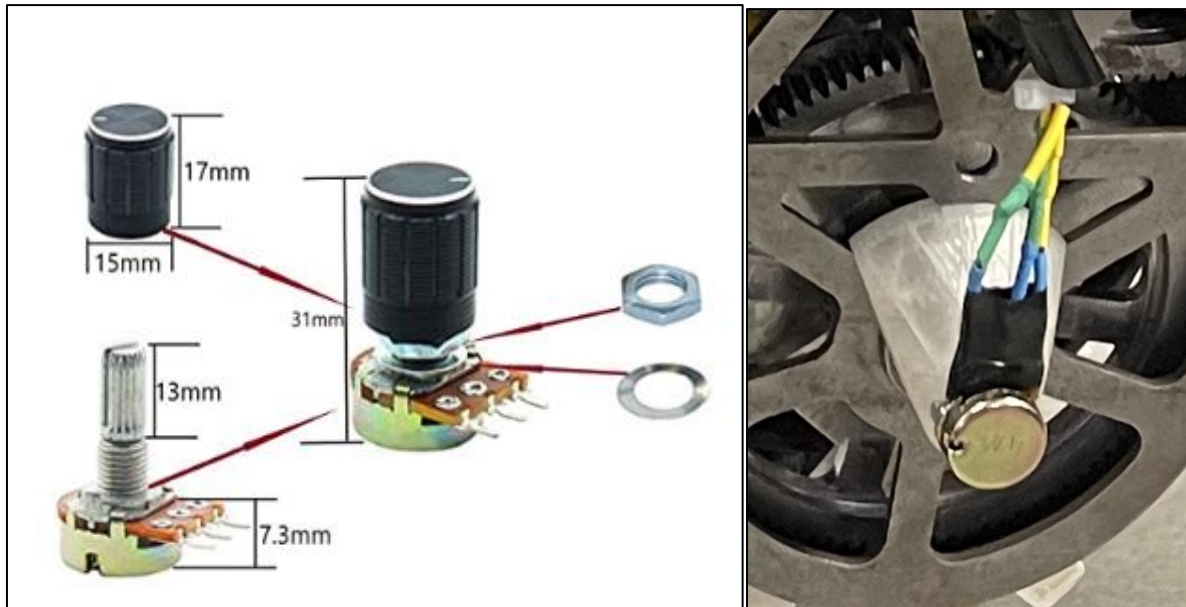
Dafurui B10kOhm Potentiometer, and Mount to Gearbox Endshaft
